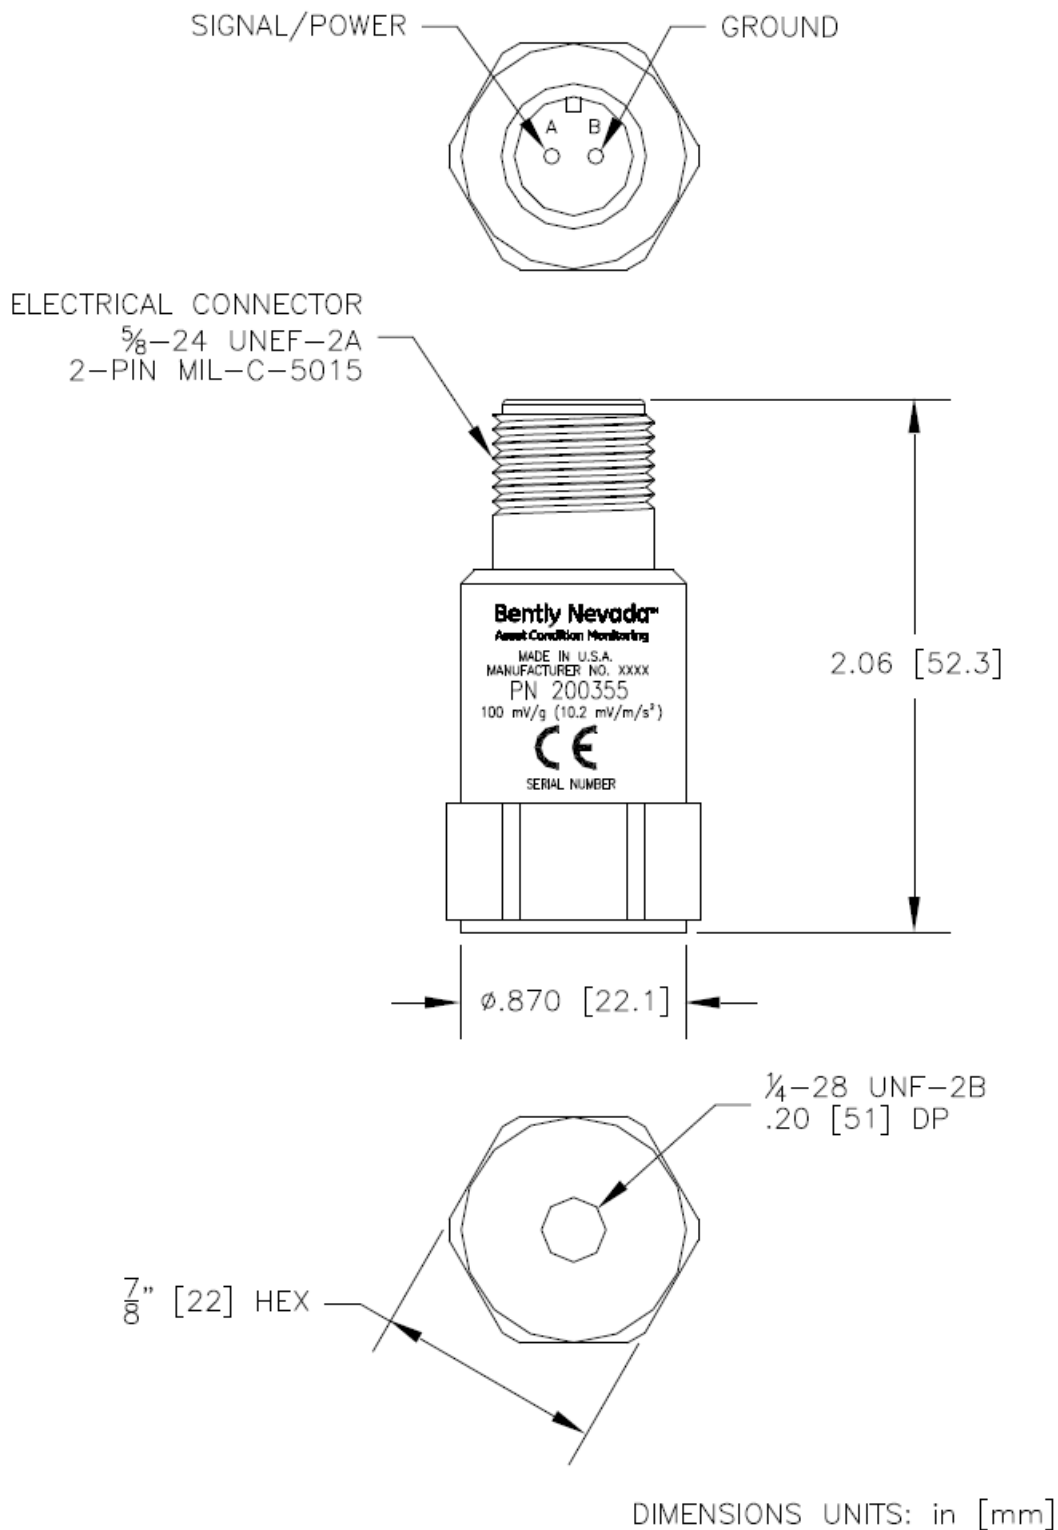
2: 200355 Accelerometer Dimensional Drawing
